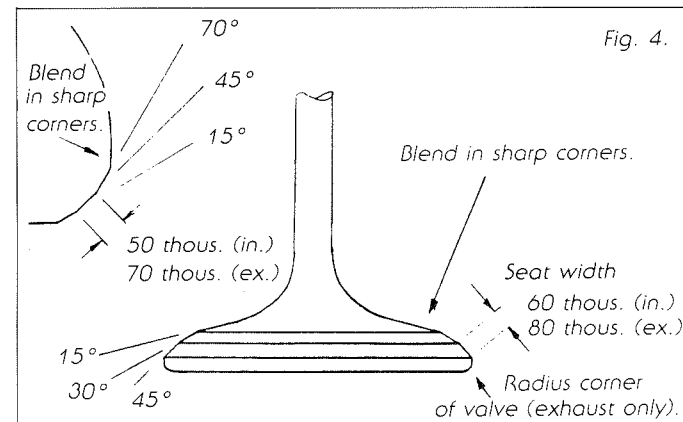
Valve and valve seat machining for inlet and exhaust valves.
